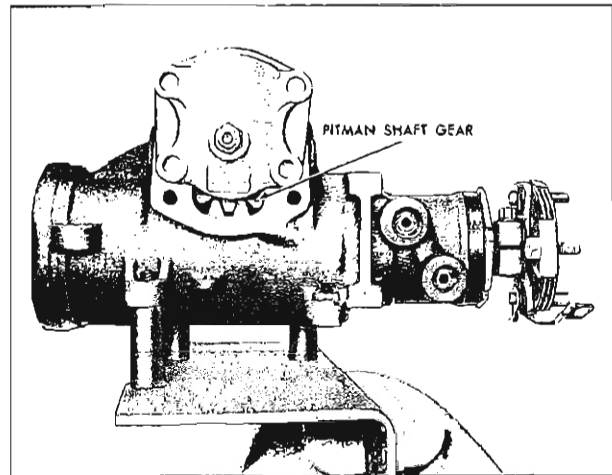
A-8 Position of Pitman Shaft Gear for Removal
